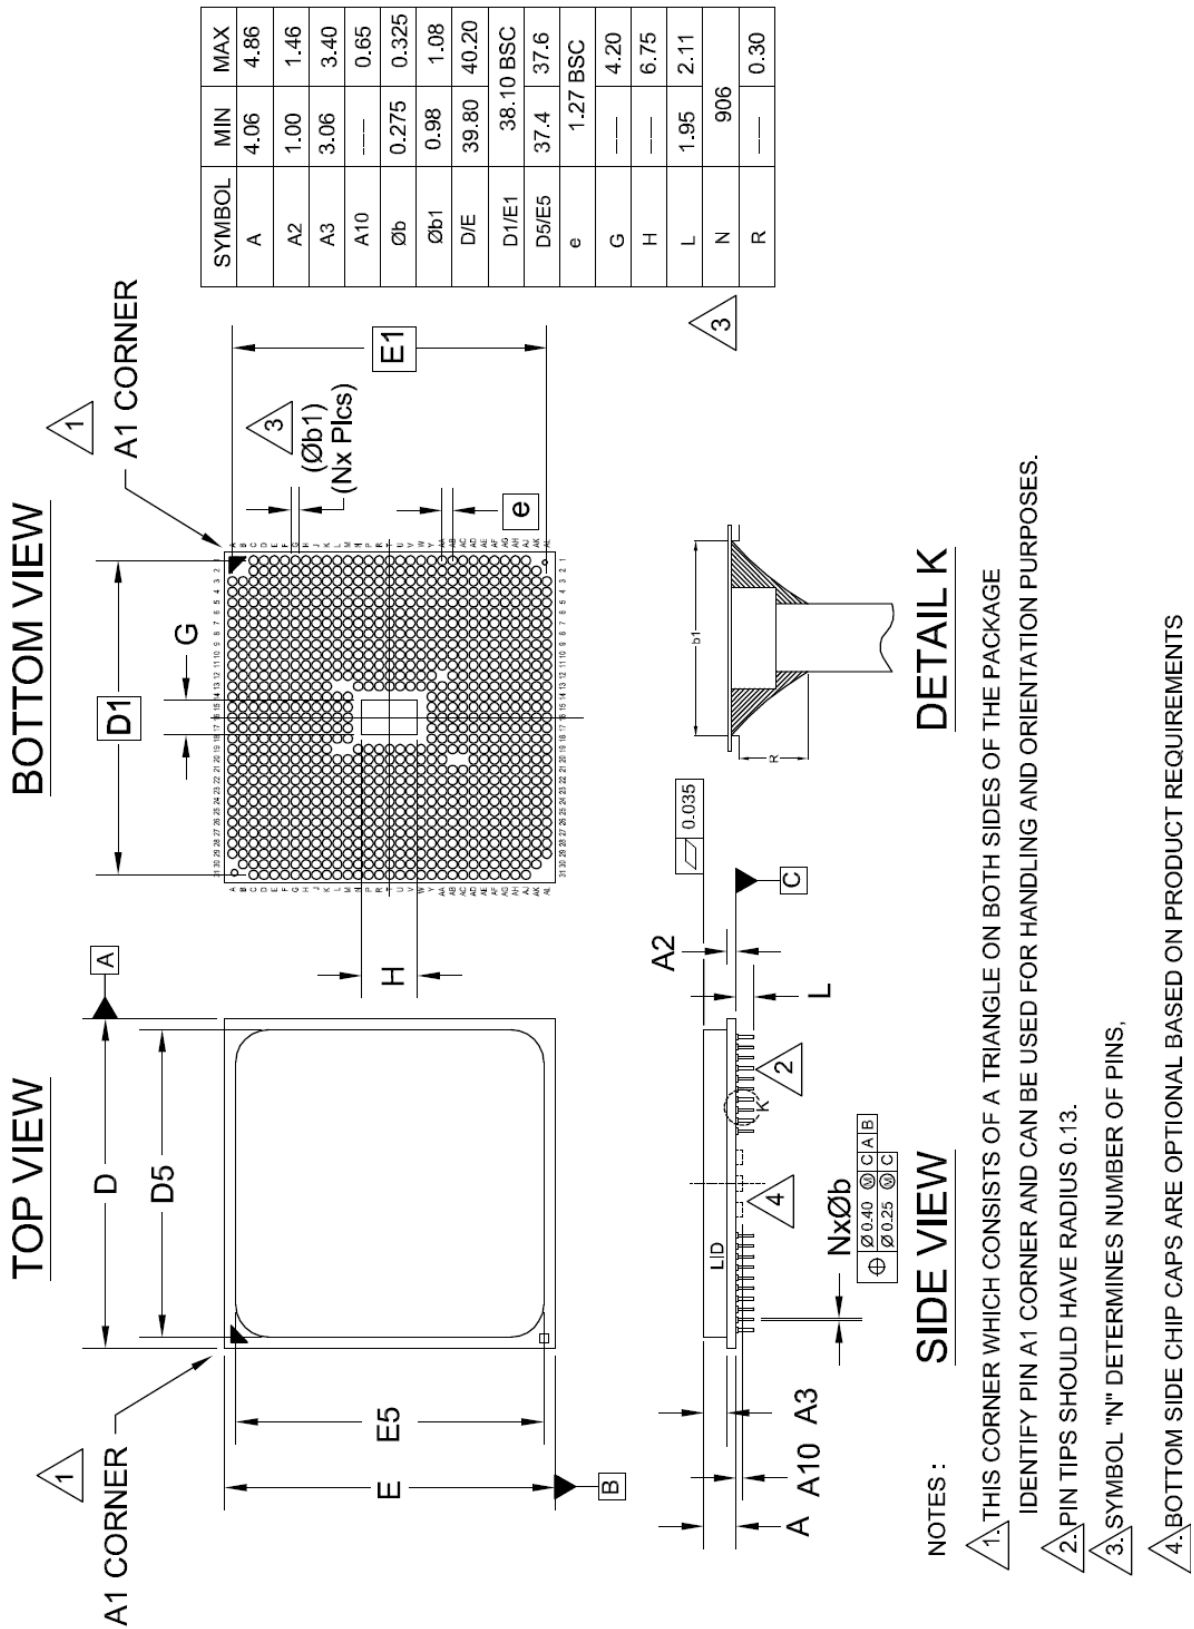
AMD 906-Pin Organic μPGA Package Drawing
